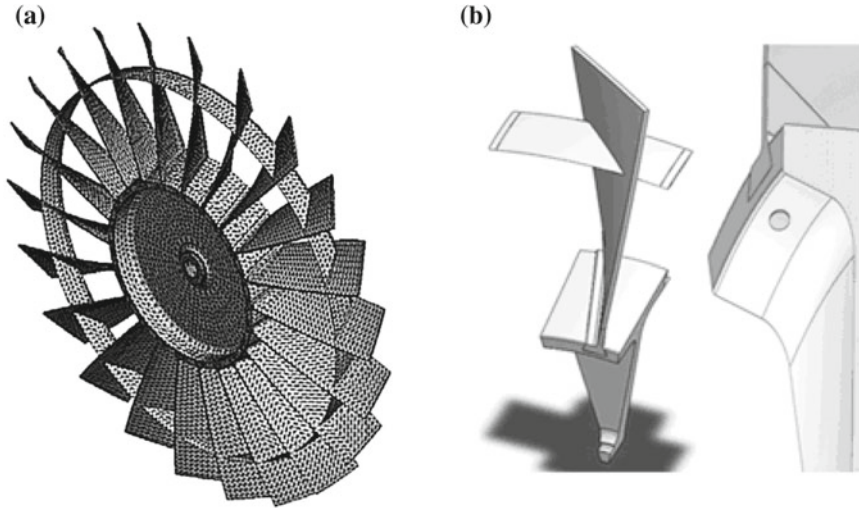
The contact system of the compressor disk and blades: a disk-blades contact structure, b disk sector with blade and part of shroud ring
